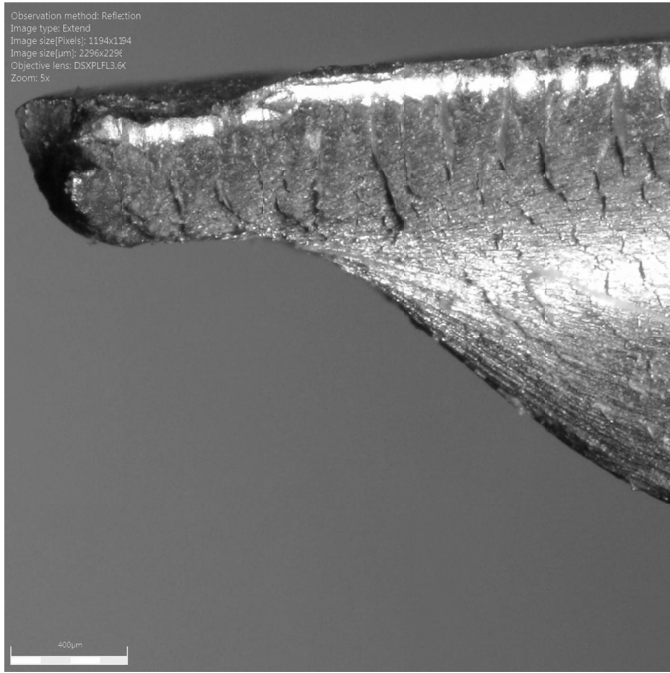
A fracture of final  $\phi 1.7$  mm-diameter wire drawn at a drawing speed of  $v = 25$  m/s in a torsion test; a characteristic fracture surface of delaminated wire with numerous cracks
